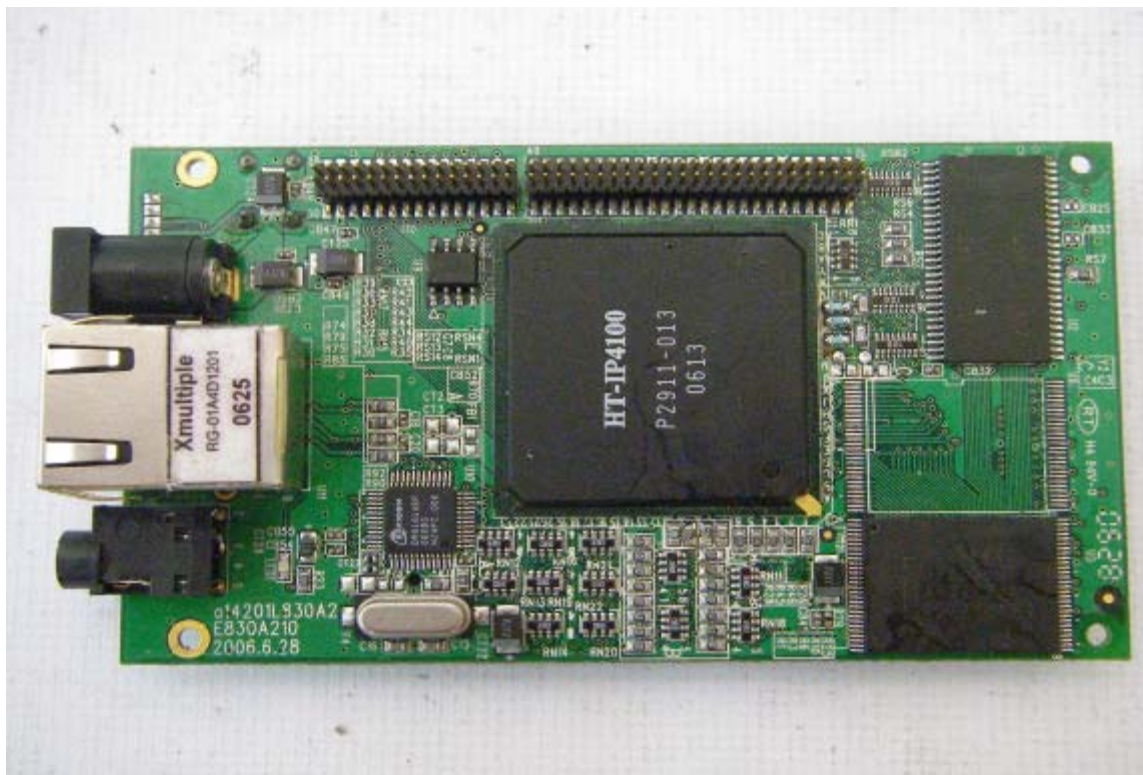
EUT SOLDERING SIDE VIEW
